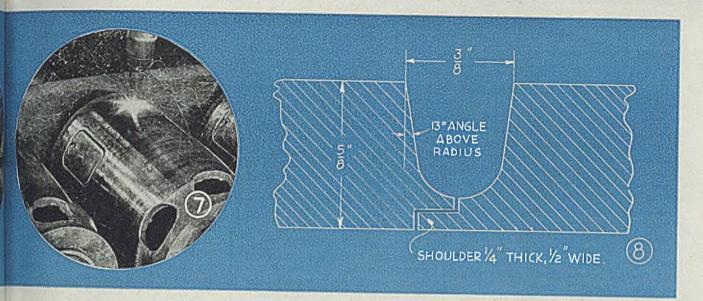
Schematic diagram showing how the circl ferential joints are prepared for welding. Show automatically forms backing for the weld which the longitudinal weld is made in a single pass on Lincolnweld machines
